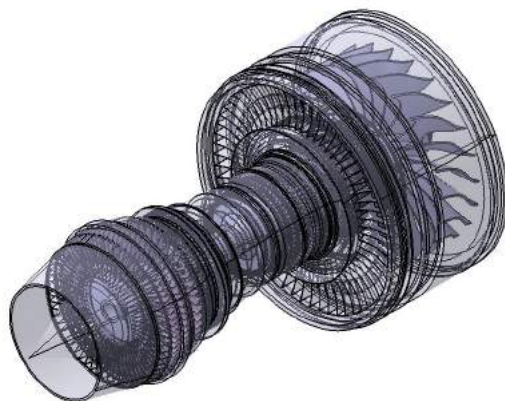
Image of a turbfan engine with translucent casing showing internal bodies that are irrelevant when designing interfaces/checking clearances, etc. with the exterior casing of the assembly.
